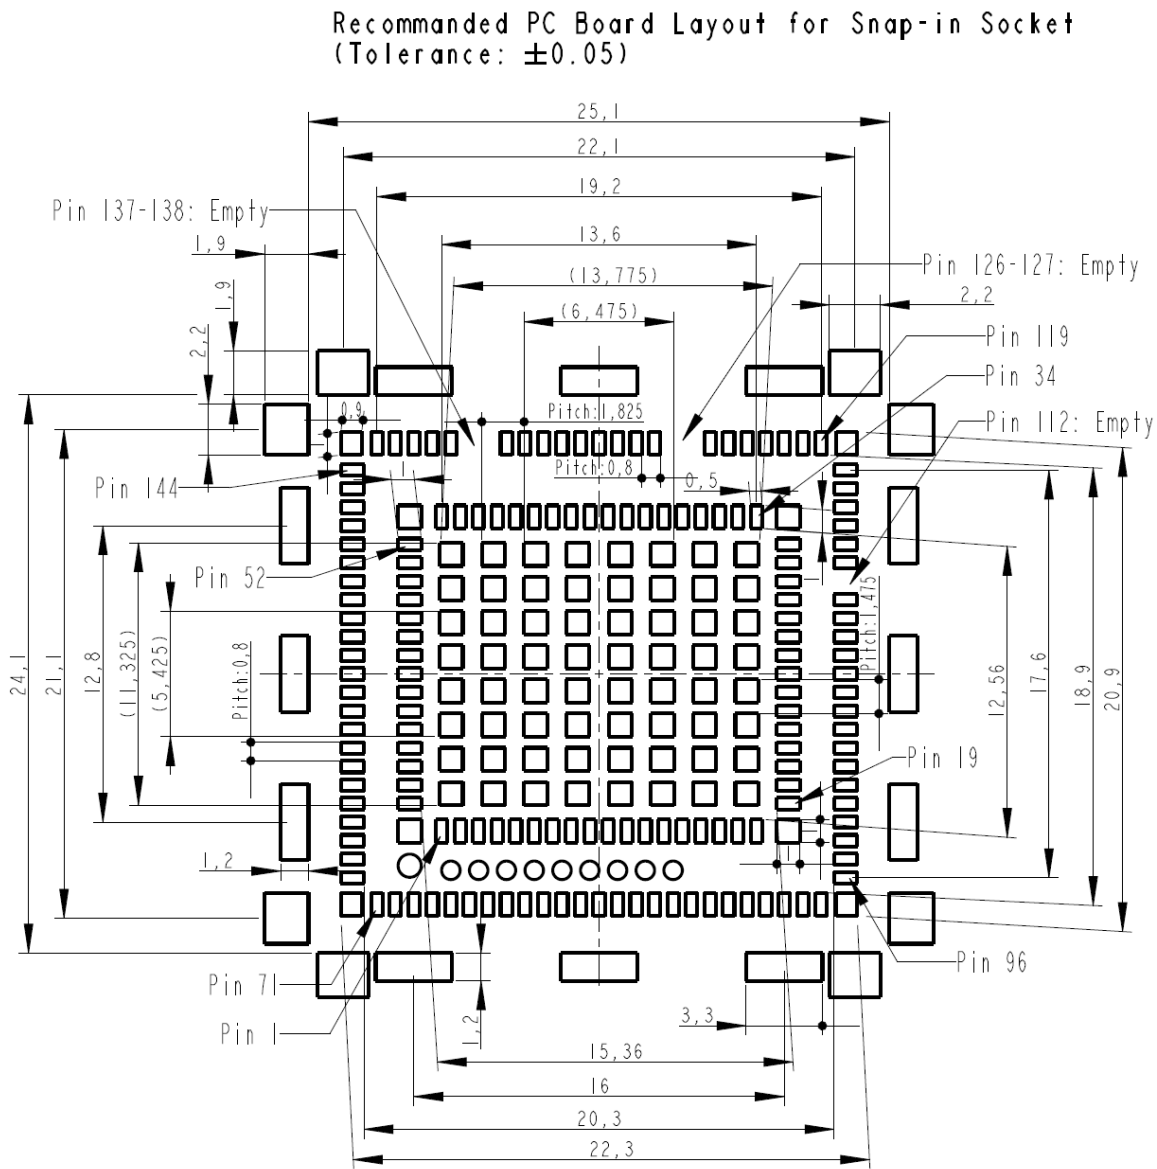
Recommended WP and RC76 Series Snap-in Socket Footprint – Copper Layout Position
